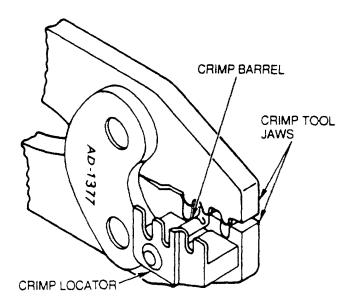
Inserting Crimp Barrel in Crimp Tool, MS22520/37
